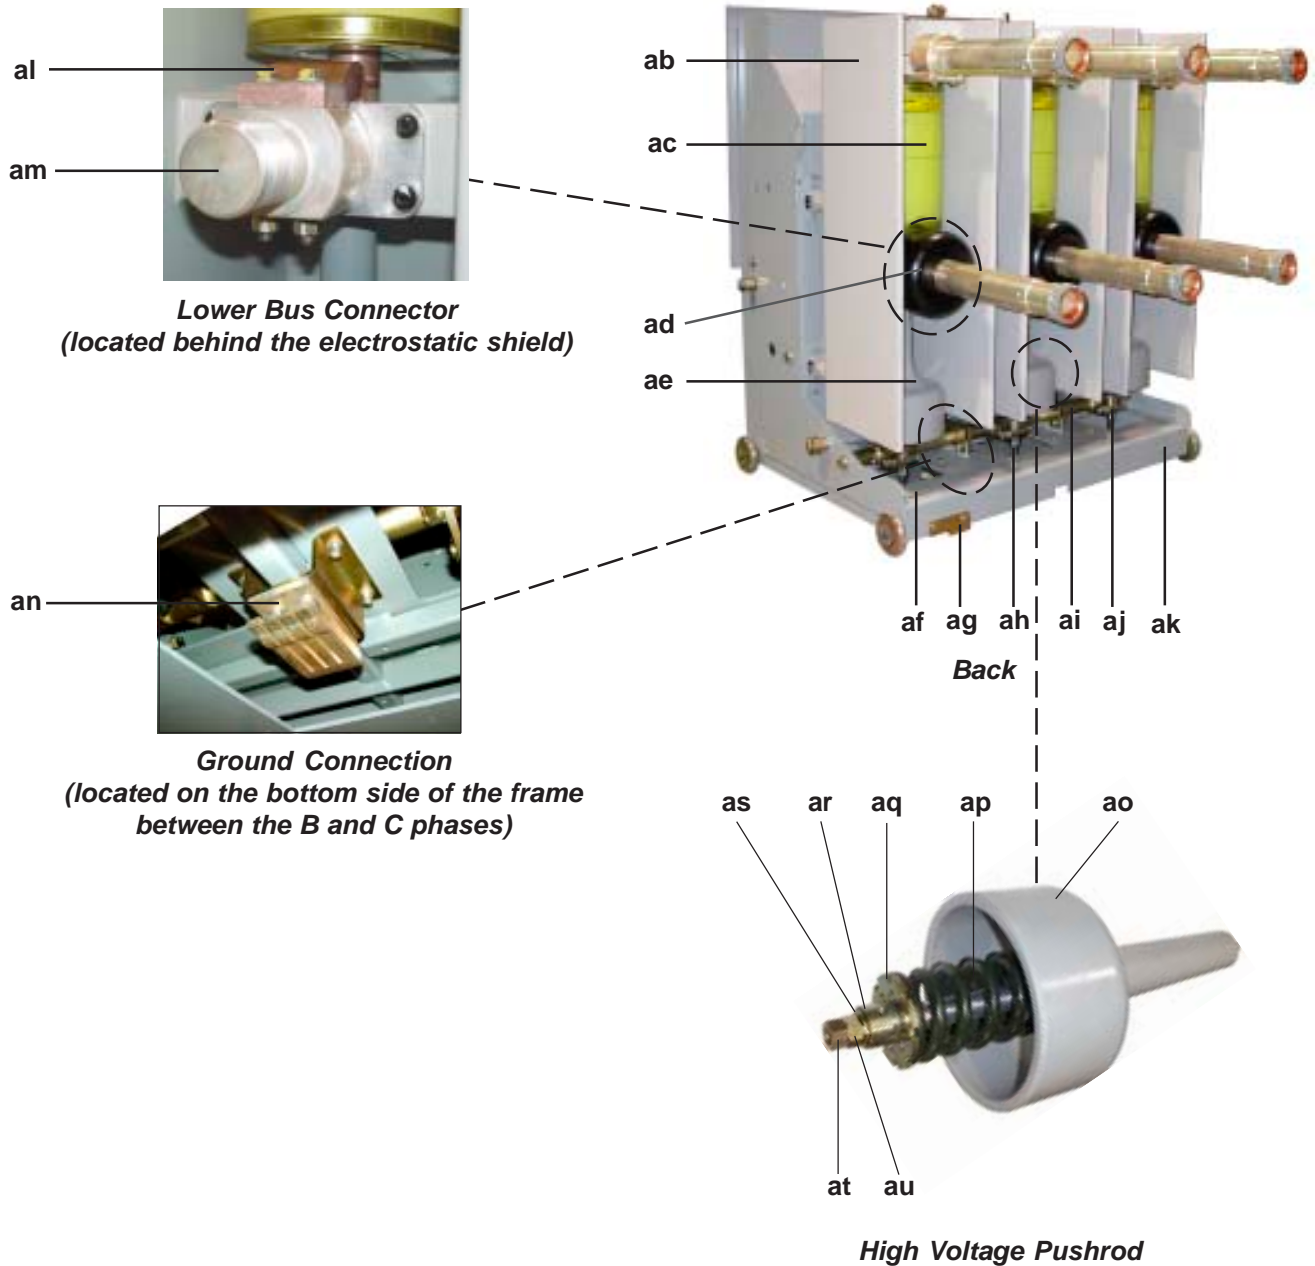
Standard Closed Door Racking Circuit Breaker (2 of 2)
